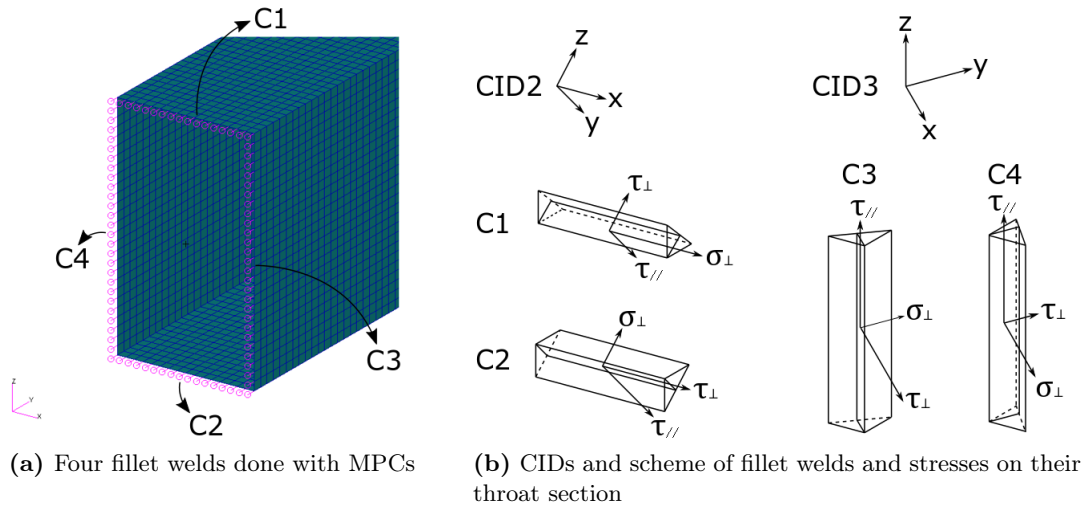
Fillet welds and coordinate systems of the welding between the thicker flange and beam with axis aligned to Y-axis
